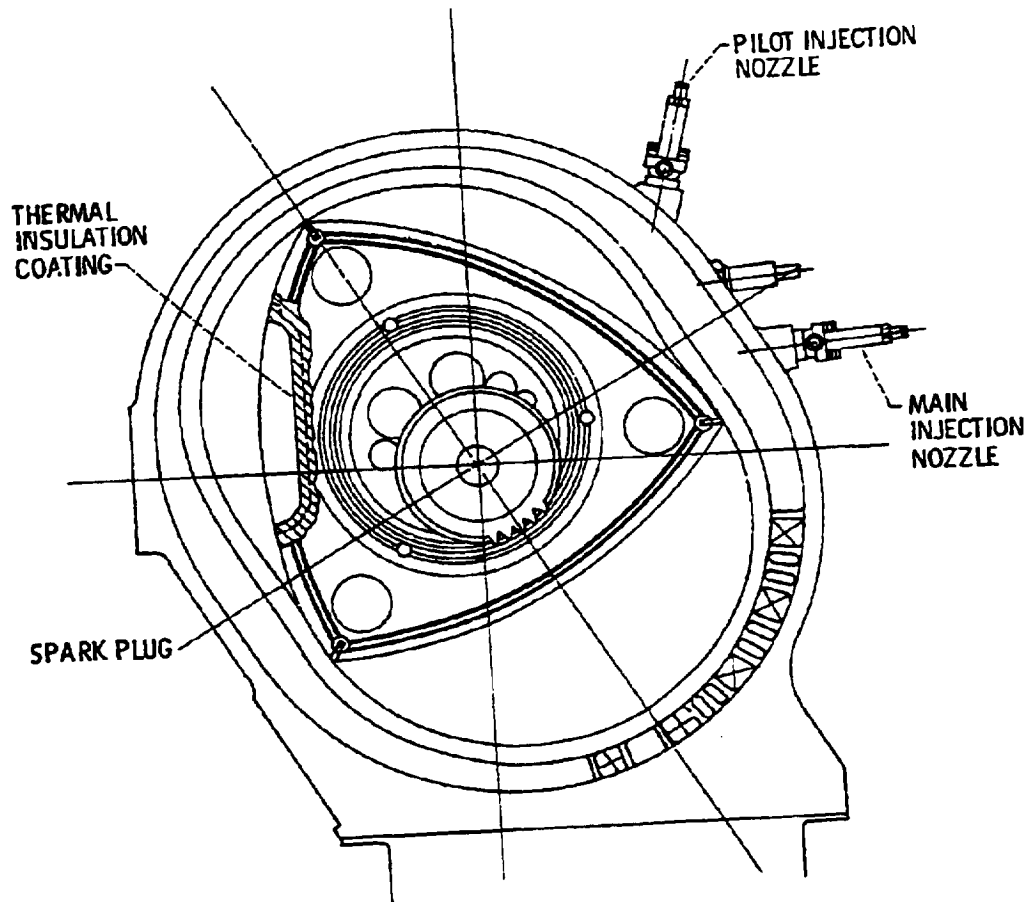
HEAT ENGINE SECTIONAL DRAWING.
